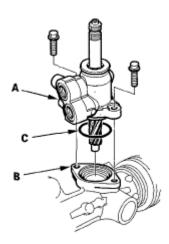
Removing Valve Body Unit From Gearbox Housing Courtesy of AMERICAN HONDA MOTOR CO., INC.
